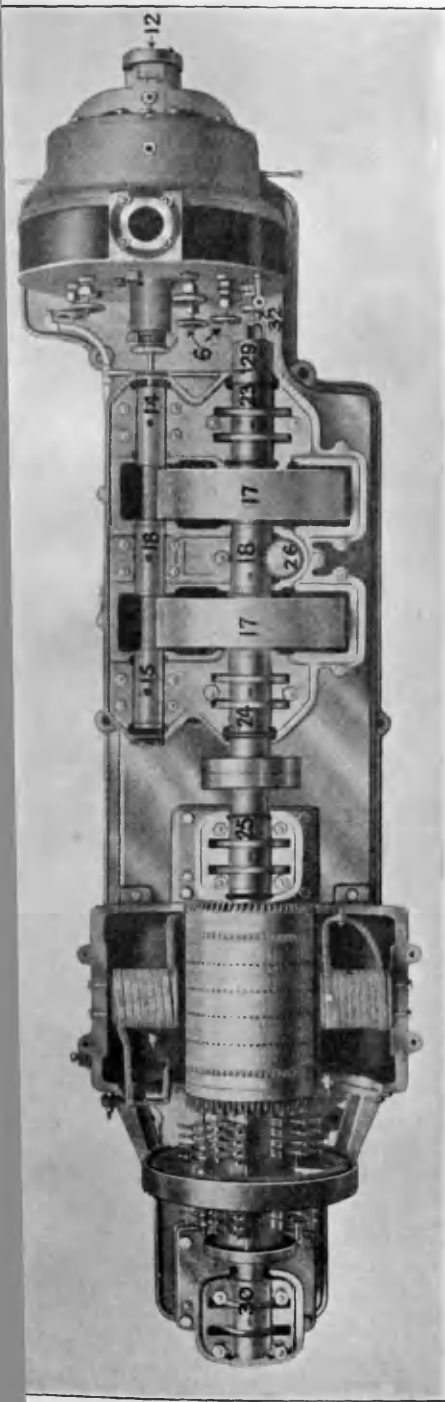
Plan of large de Laval Single Gear Turbine and Dynamo (with gear cover removed).
